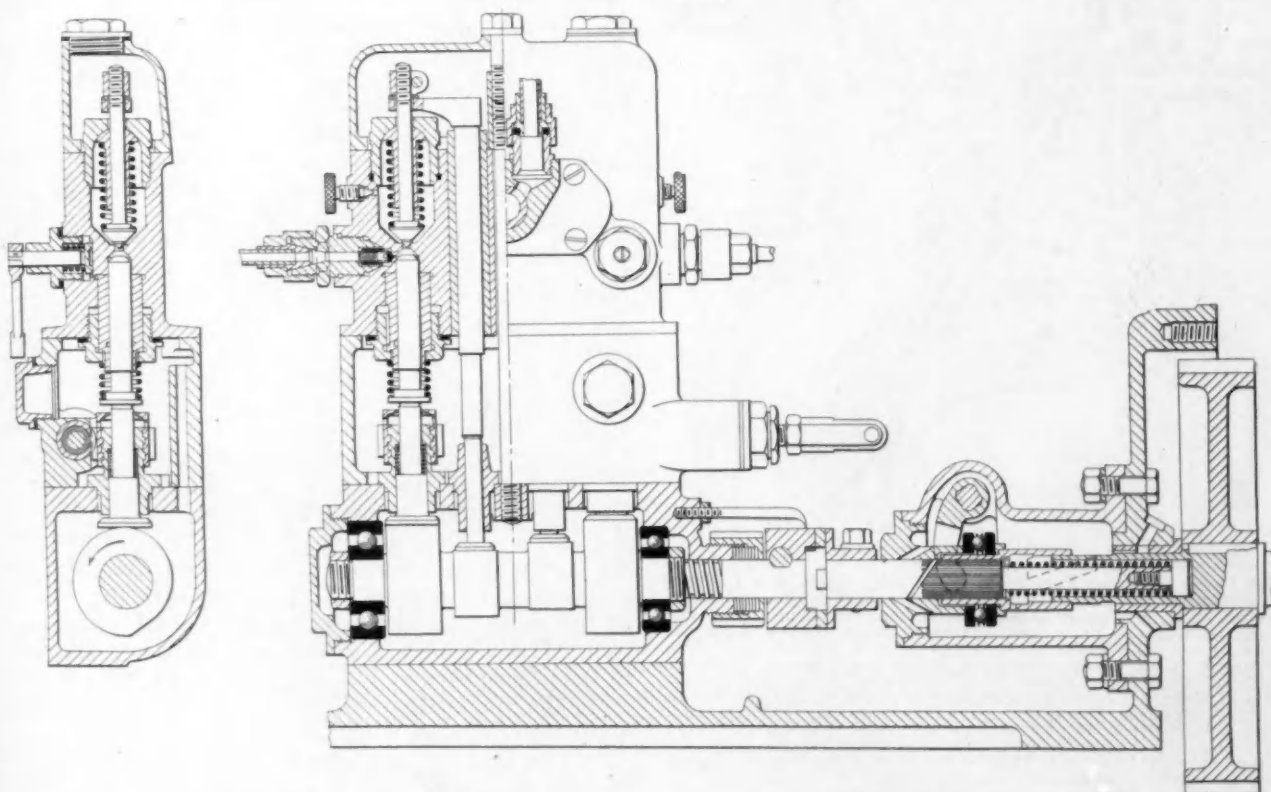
PART OF THE FUEL-INJECTION SYSTEM OF THE PEUGEOT ENGINE
